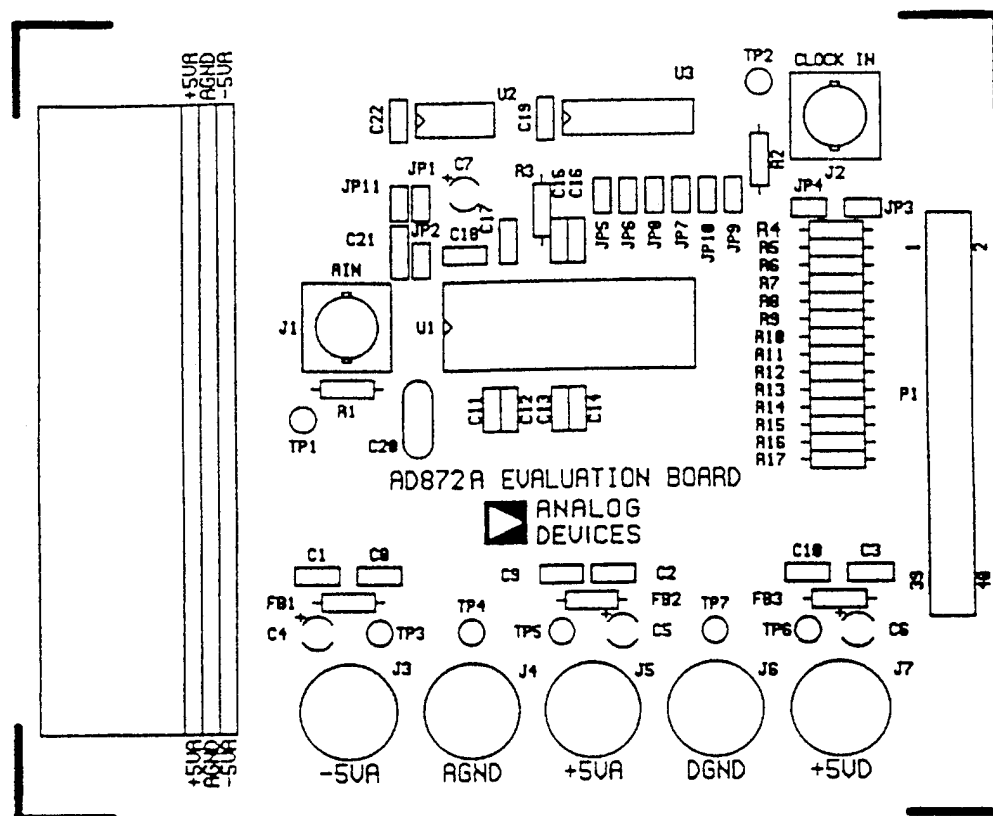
Silkscreen Layer PCB Layout (Not Shown to Scale)
